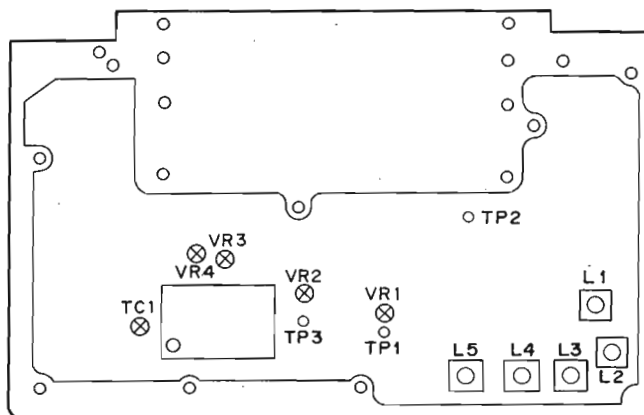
28 MHz Band adjustment: Component layout (upper view)
